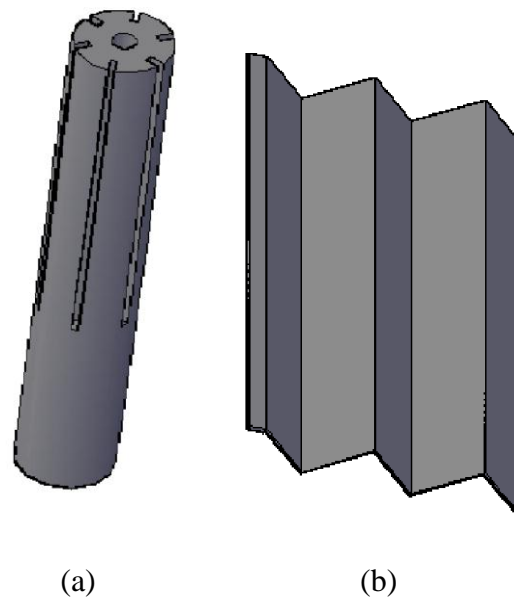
Schematic 3D apparatus (a) cylindrical heat sink (b) plane corrugated fin.
